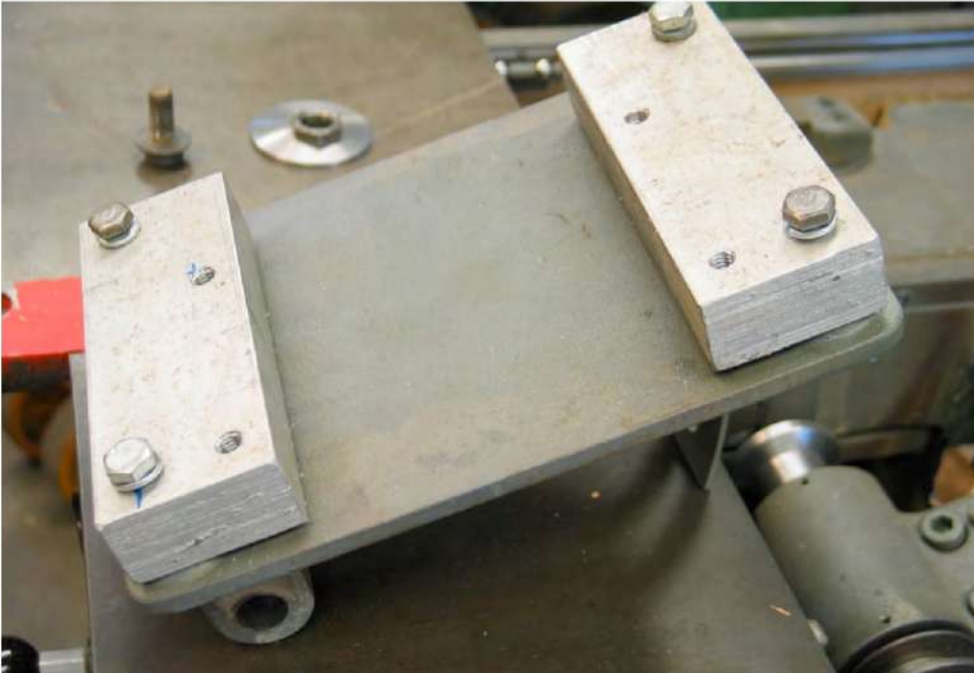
New aluminum spacer blocks 1" high were made to compensate for the difference between the old motor and the new 56 frame motor. New holes had to be tapped for the new base also.
